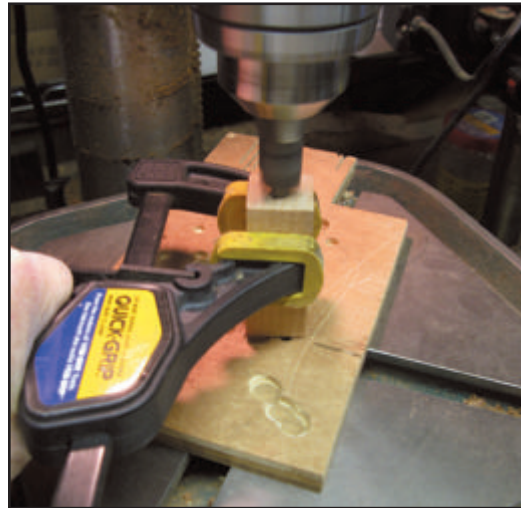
The multitasking quick clamp is a drilling vise, cutting clamp, assembly tool, and hanging fixture when clamped on a floor joist.
